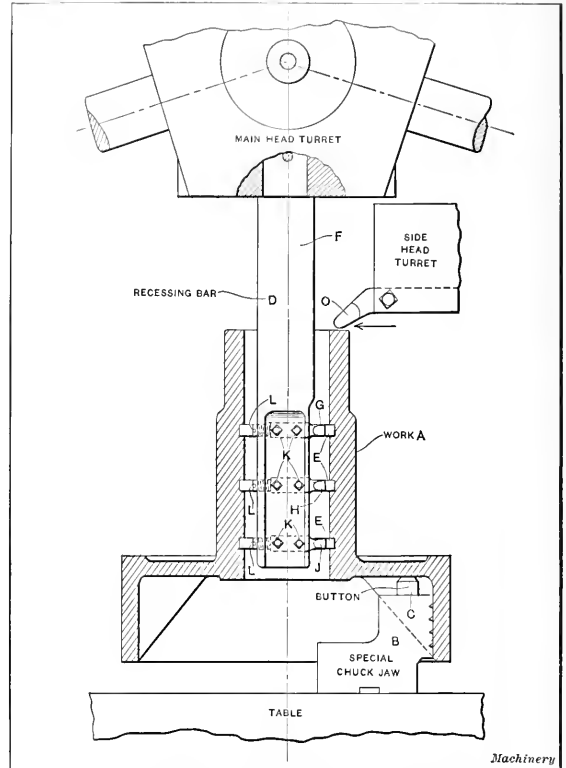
A Multiple Recessing Tool used in a Vertical Turret Lathe
